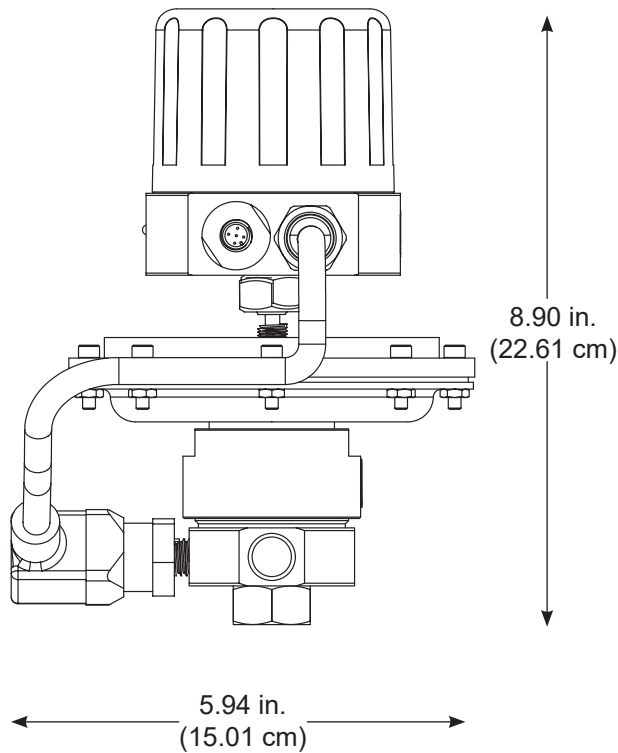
Electronic Pressure-Reducing Regulator Dimensions
